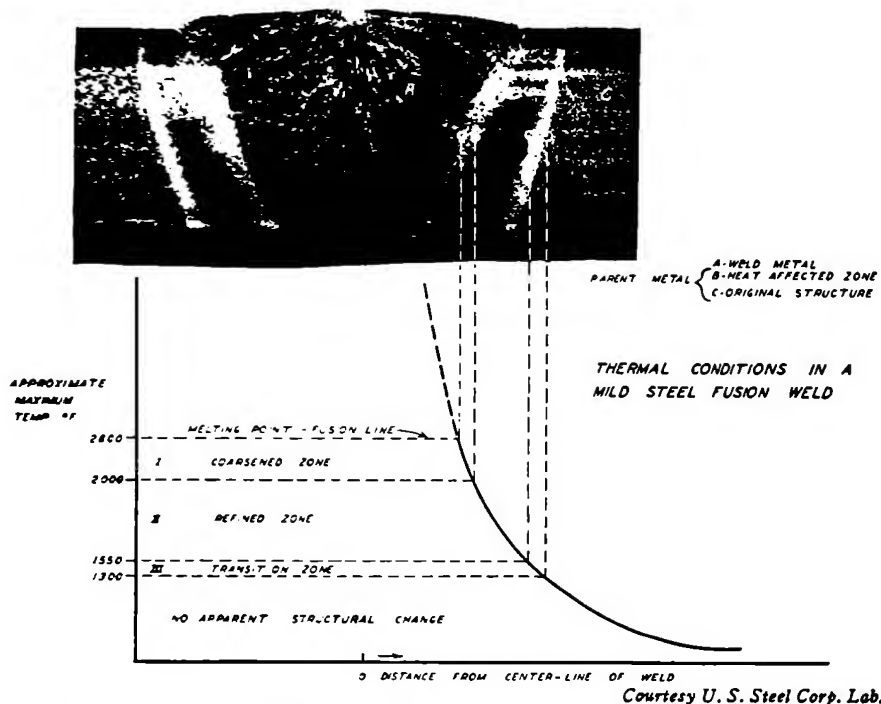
Typical macrostructures and maximum attained temperatures in a butt weld
